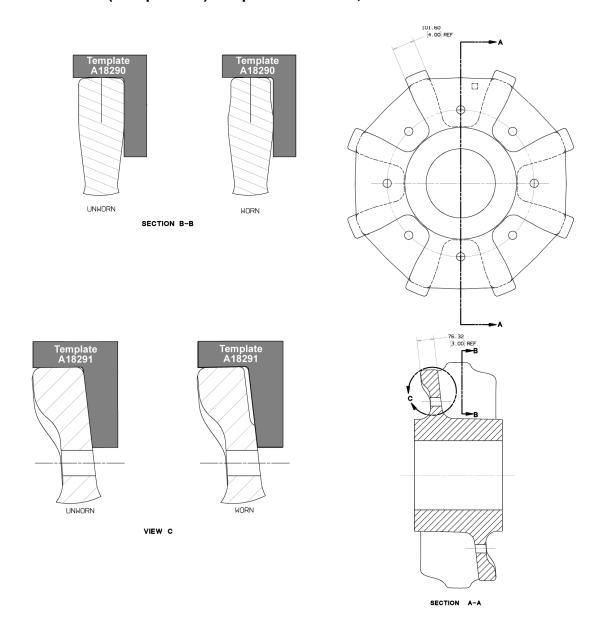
Drive tumbler (no sprocket) templates — 16000, 18000
